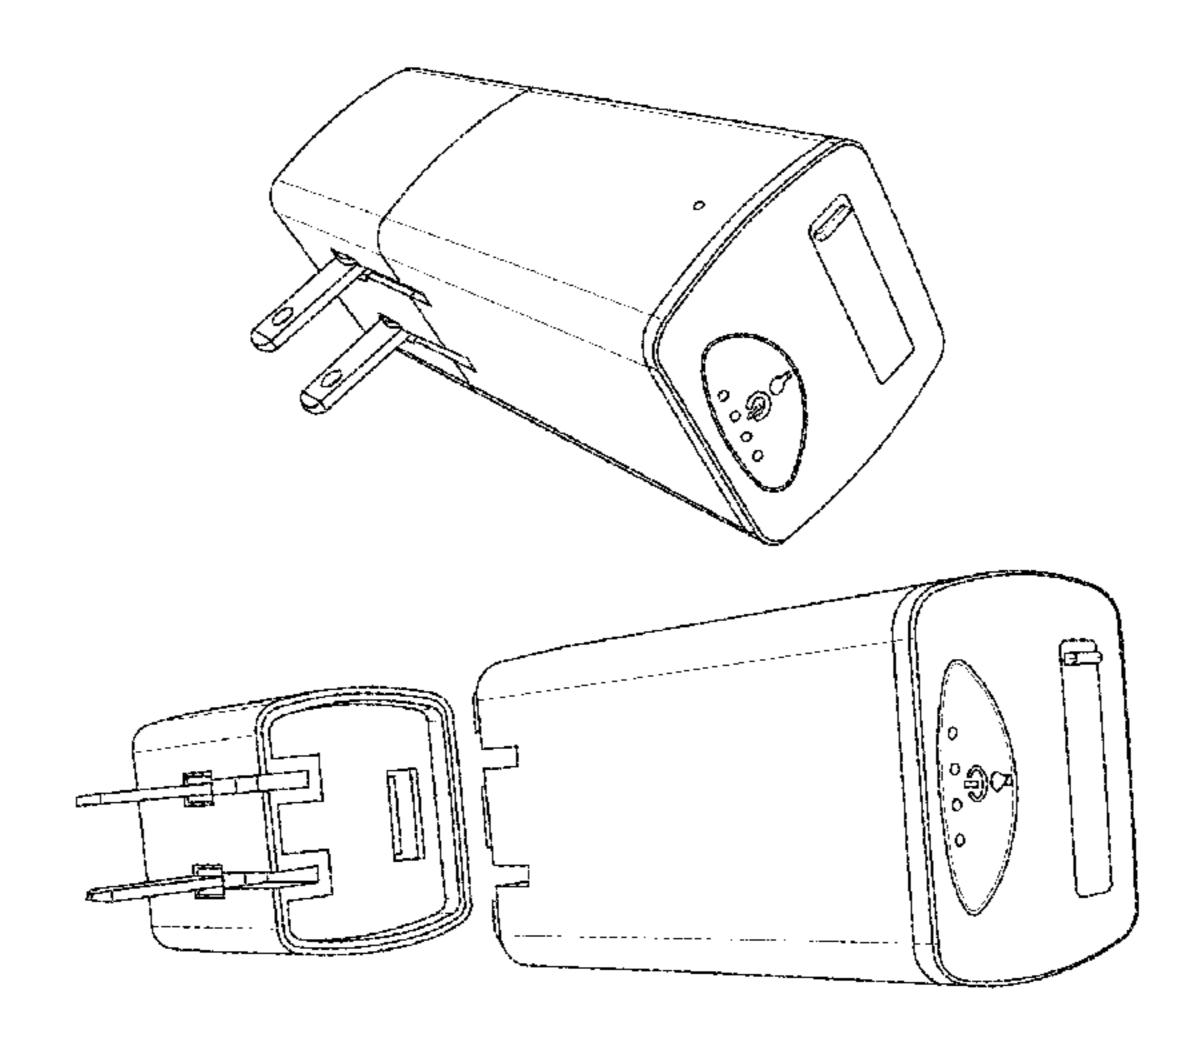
is a second exploded perspective view of a portable power adapter and converter showing my design with the electrical prongs folded up.
